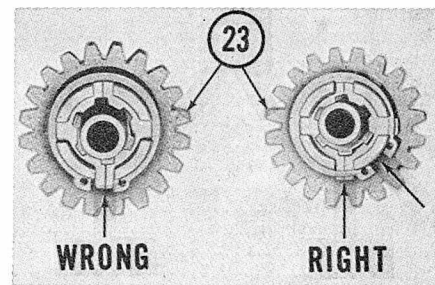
View of fourth gear positioning pieces and snap ring (23, 24 & 25—Fig. S2-18) assembled. Split in positioning pieces and opening in snap ring should not be aligned.
